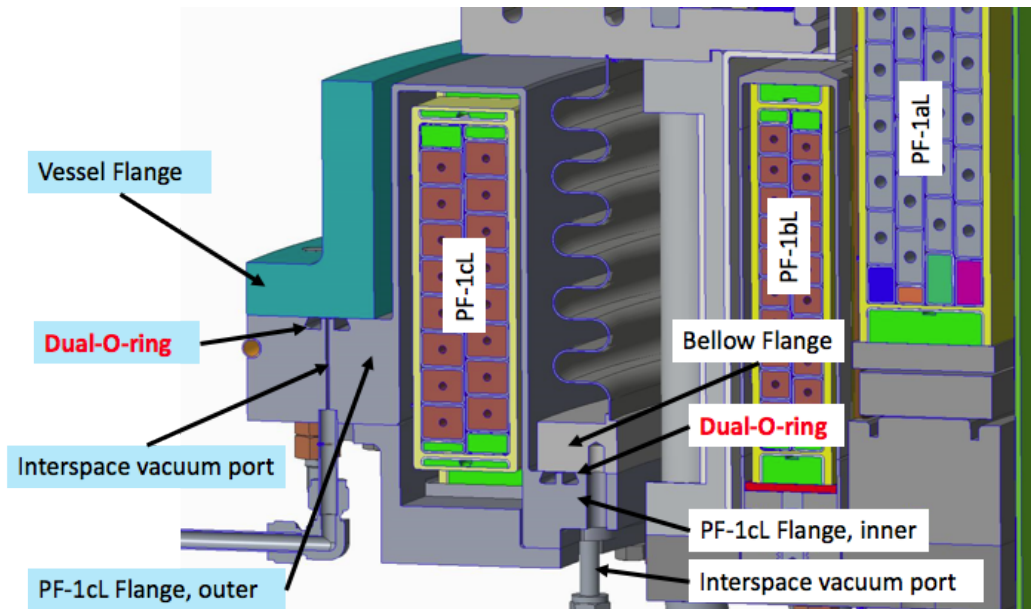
Center Stack Flange Interspace Pumping Vacuum Interface (Lower)
